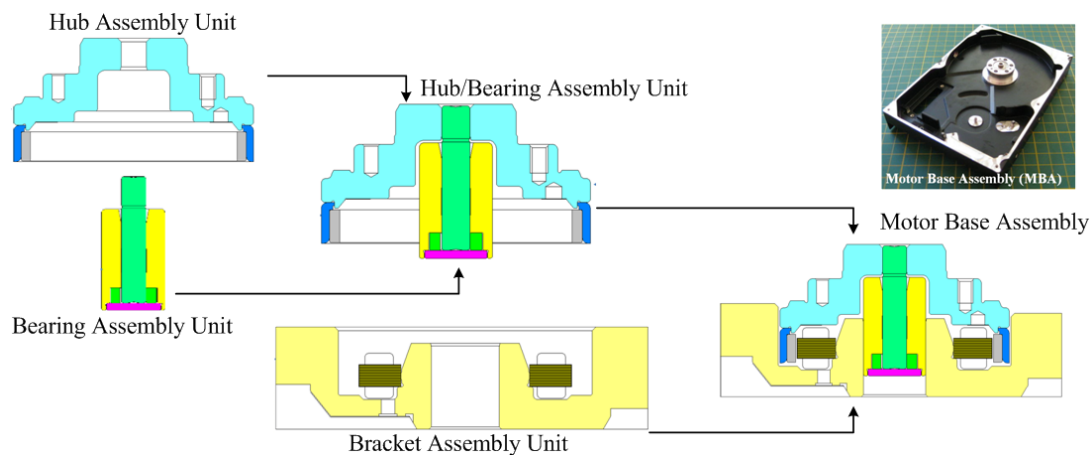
Schematic view of spindle motor hub assembly (or motor base assembly)
